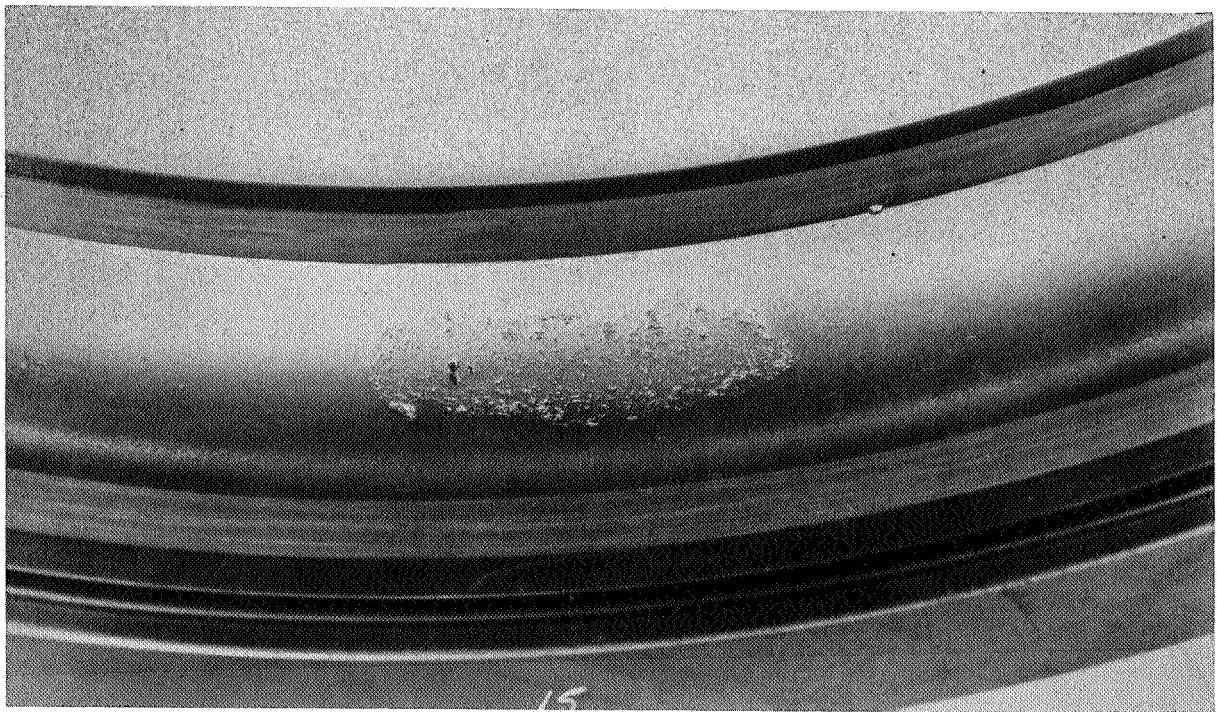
FATIGUE FAILURE - OUTER RING - BEARING S/N 15
